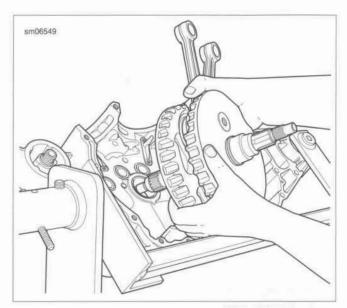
Removing Flywheel Assembly From Right Crankcase Half
